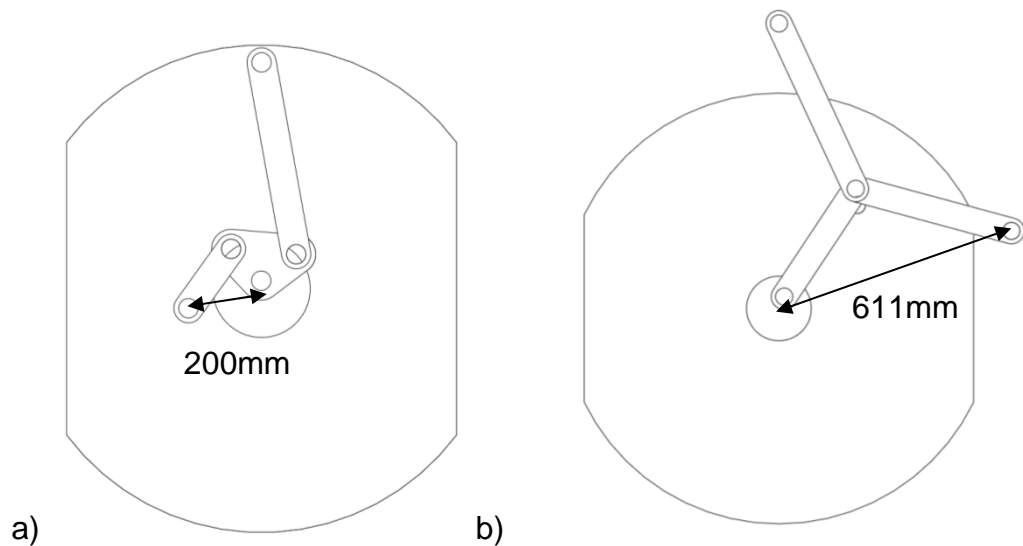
Definition of footprint radius for a) 3-link mechanism and b) 4-link mechanism
